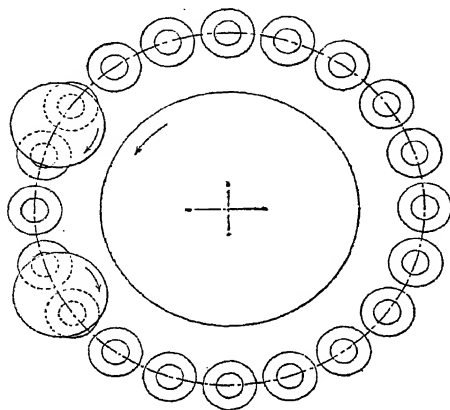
Arrangement of roughing and finishing cutters for a drum-type of continuous machine.
